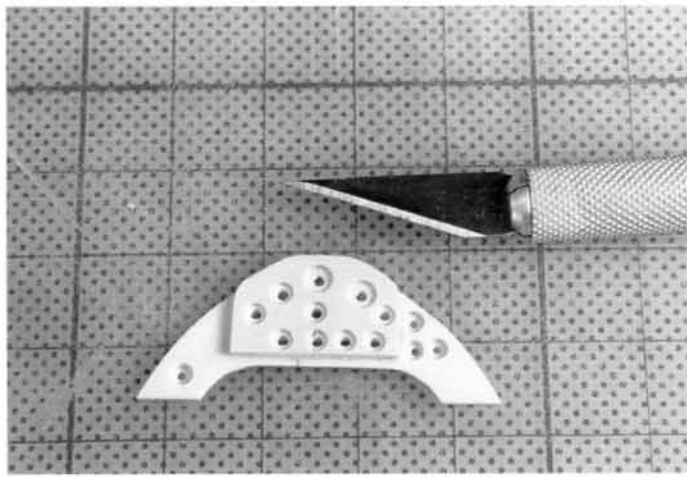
Here the completed console is ready to be painted. After painting, you'll insert the instrument faces into the holes.
